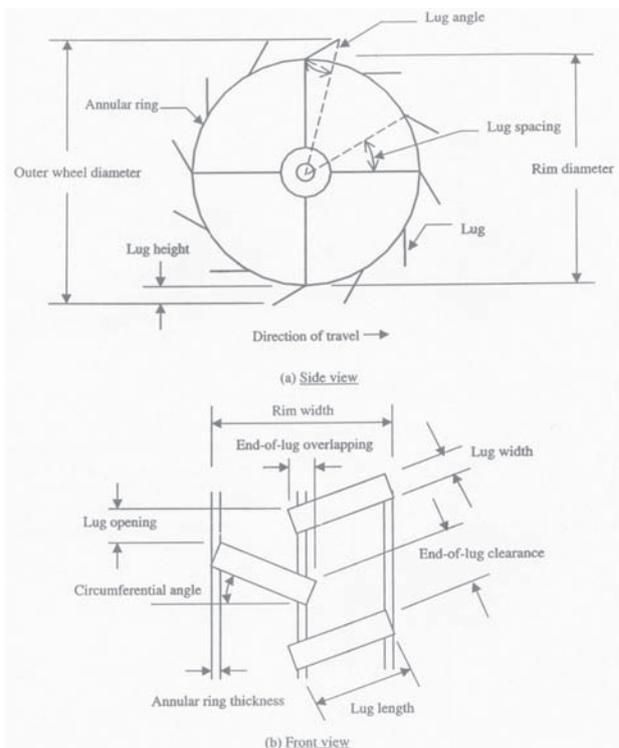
Sketch of cage wheel parameter, (a) side view; (b) front view (Watyotha and Salokhe, 2001)
